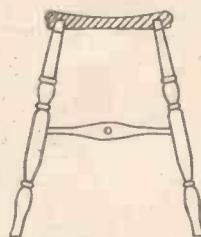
Completed stool, showing seating in section and the spreaders for the legs.
